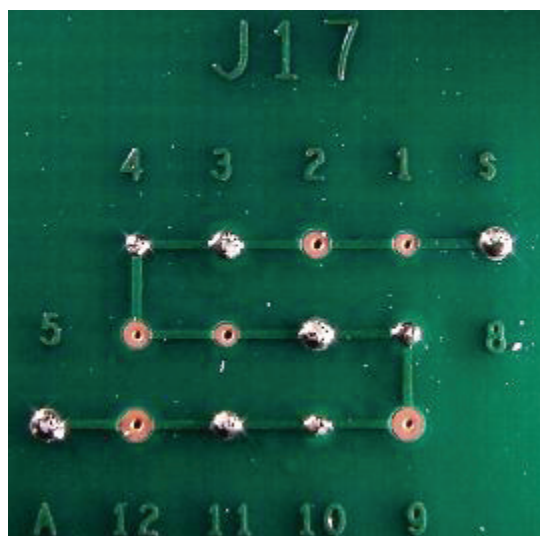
Convex Solder Configuration on Pins 3, 4, 7, 8, 10 and 11
